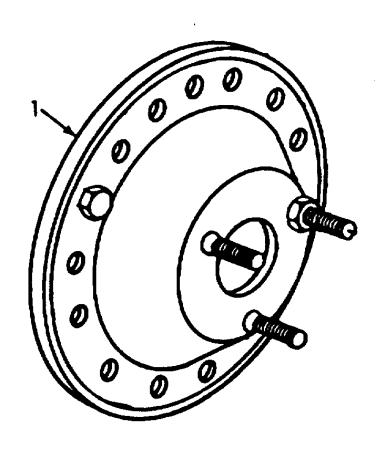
AIR HYDRAULIC CHAMBER ASSEMBLY.
